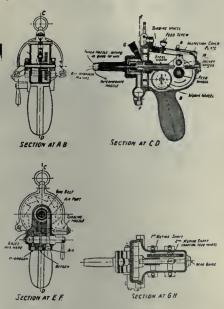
SECTIONAL DRAWINGS OF THE SPRAYING MACHINE OR PISTOL.
